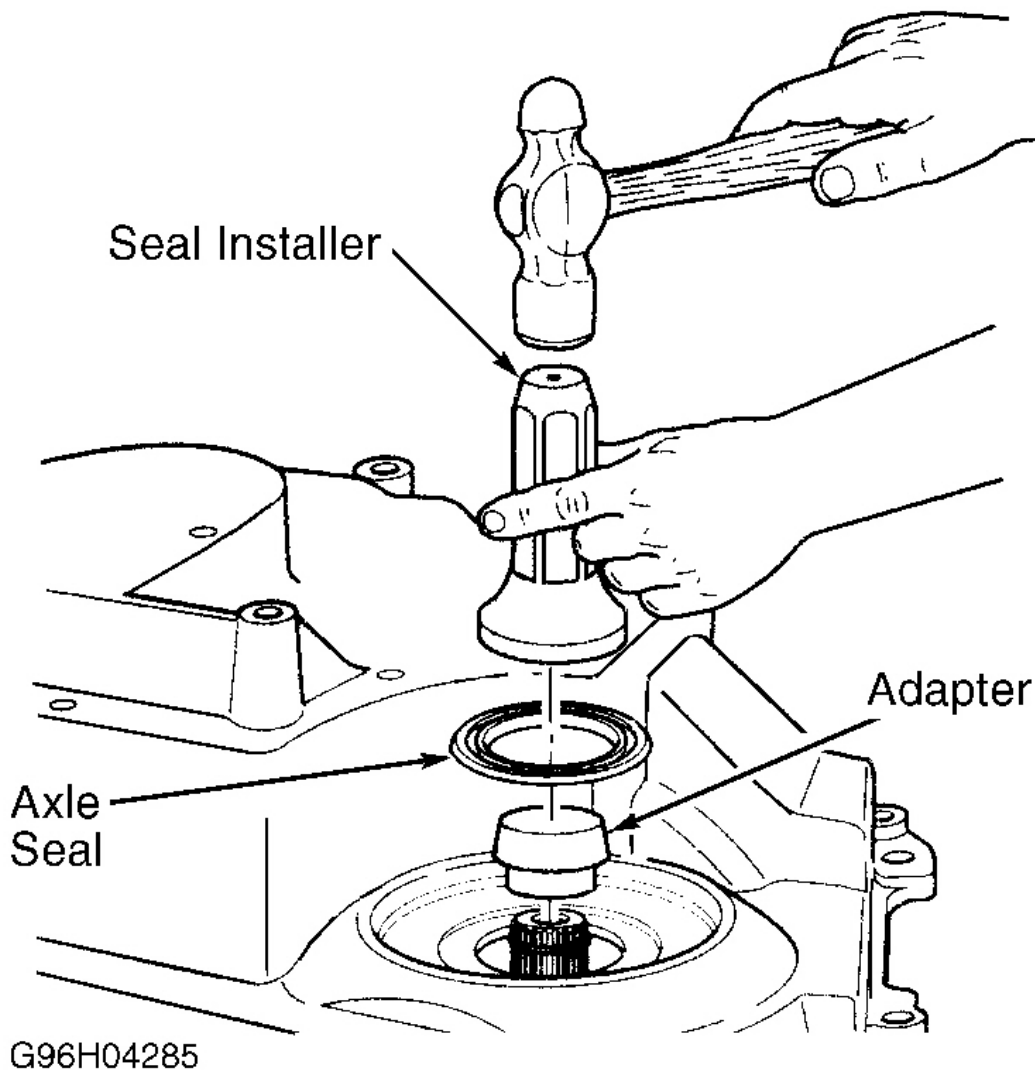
Installing Axle Seal (Left Side Shown; Right Side Is Similar)
